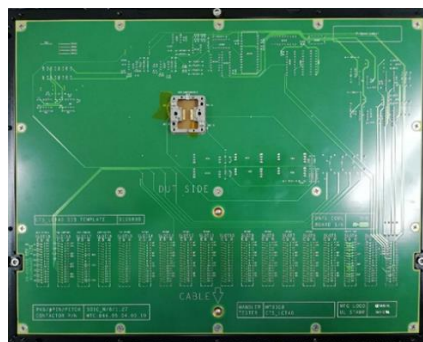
The fabricated re-spin board-an SBI with new with surface mount DUT pads
